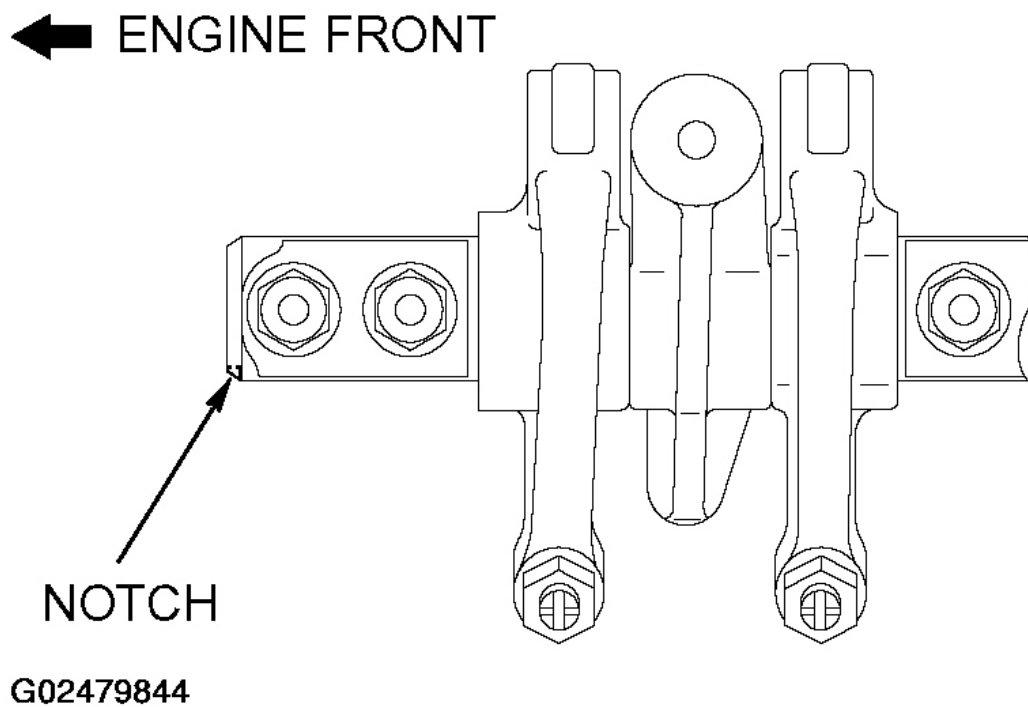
Installing Exhaust Rocker Arm Shaft Caps
